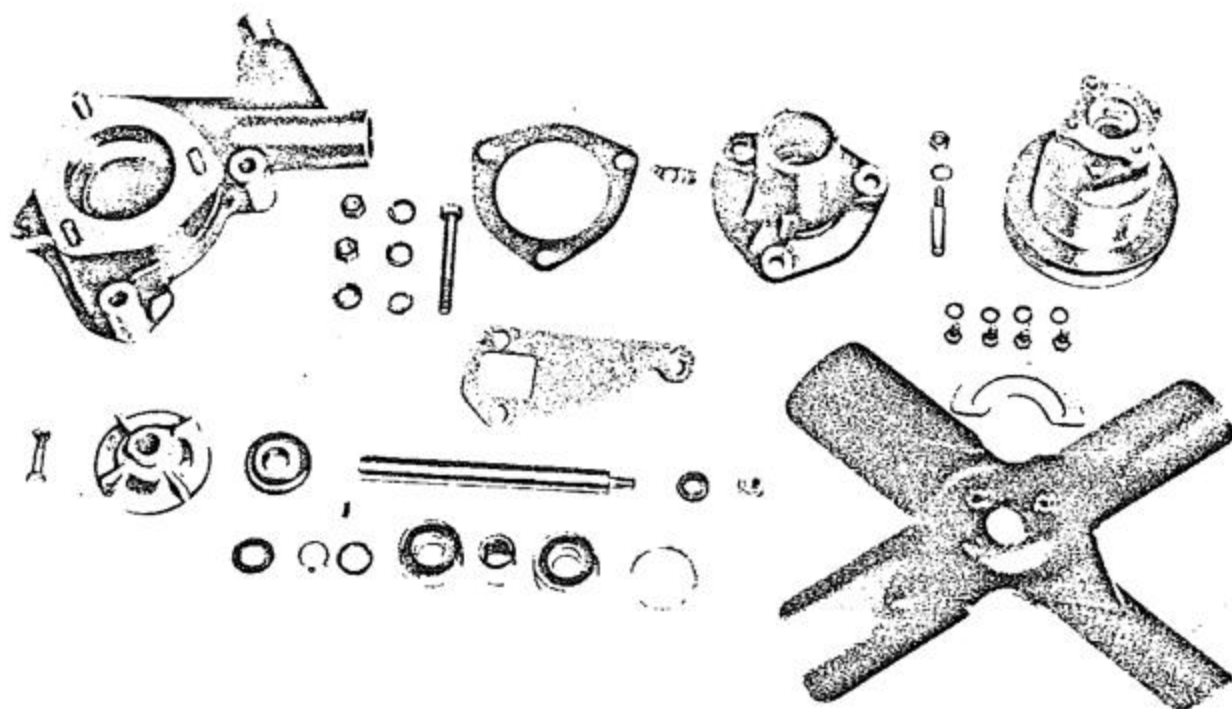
Exploded view of water pump items—assembly Detail No. 500113 (used on Engine Nos. V46611E and future)
